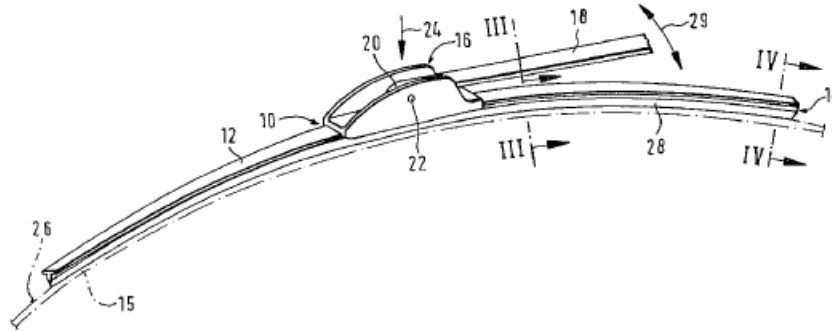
of the '698 patent showing a perspective view of a wiper blade connected to a wiper arm
